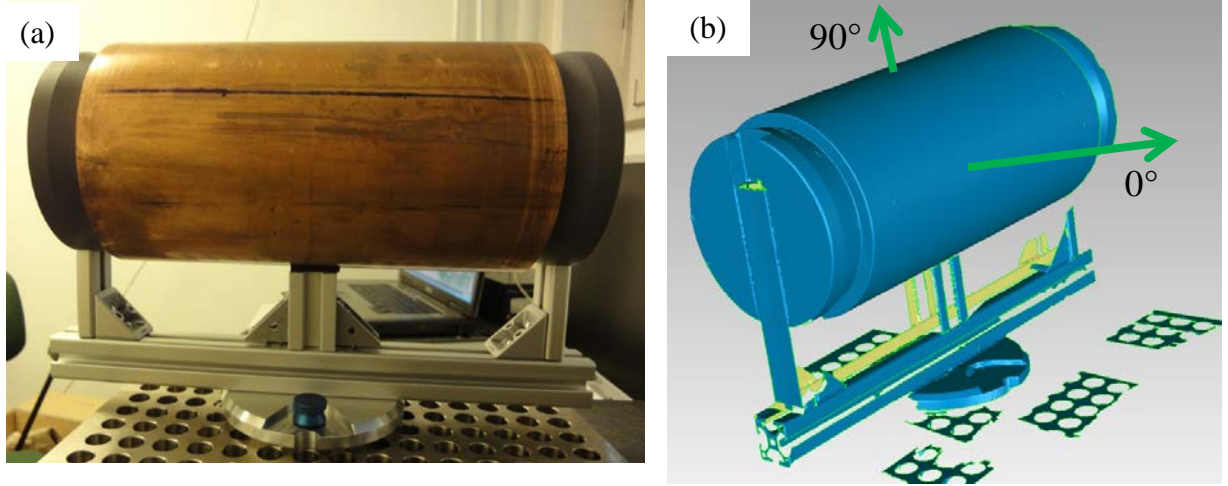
(a) Cu-tube segment mounted on the sample holder (b) Three dimensional laser scan for Copper tube segment mounted on sample holder for texture configuration [128]
